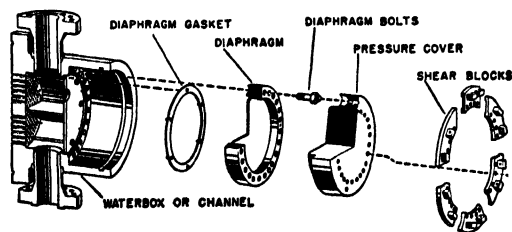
High-pressure, shear-block type Lockhead closure for tubular-type feedwater heaters. (Courtesy of Foster Wheeler Corp.)
